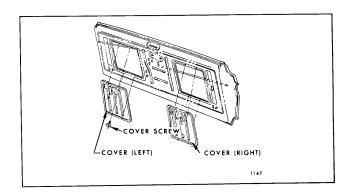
Tail Gate Inner Panel Access Hole Covers
